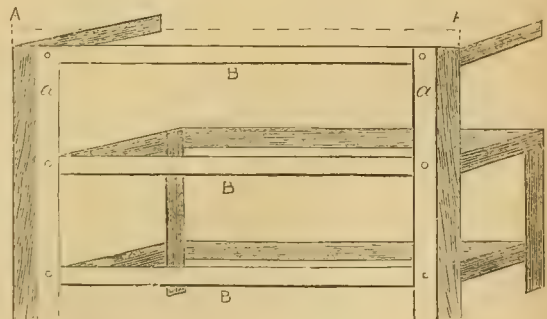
BACK VIEW OF SKELETON OF CABINET, PEGGED TOGETHER.
